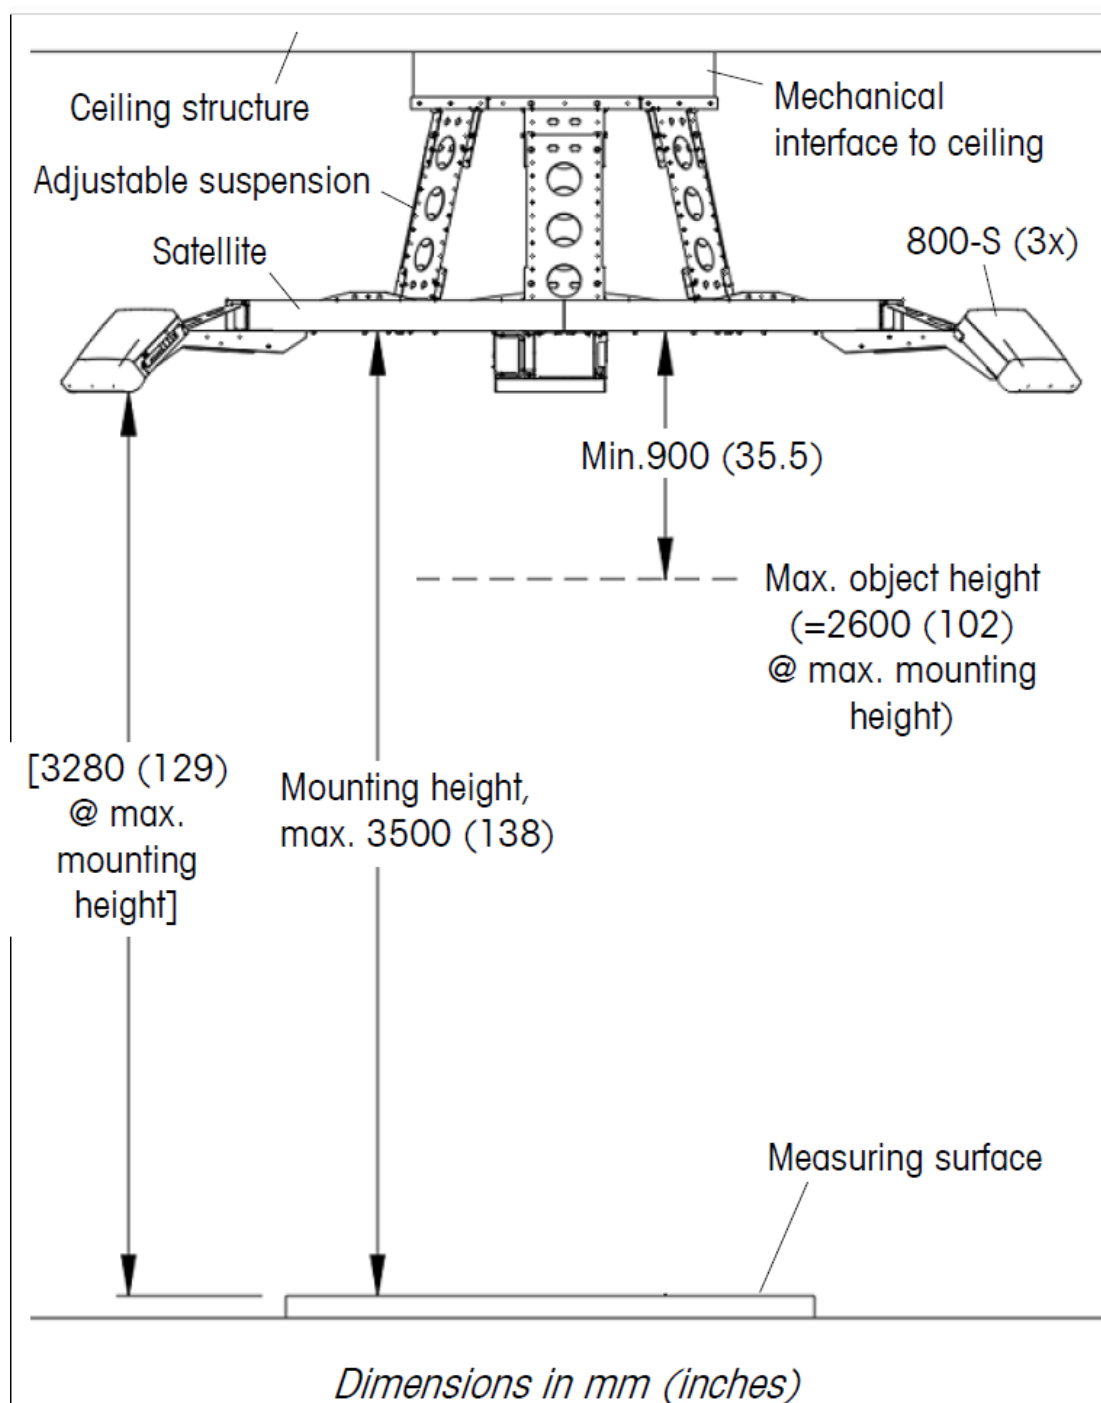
Drawing showing the dimensions of TLD870: Mechanical Layout of system (side view). Dimensions in mm. Mounting height is 600mm higher than tallest object to be measured. Illustrated system can measure objects of height 2600mm
